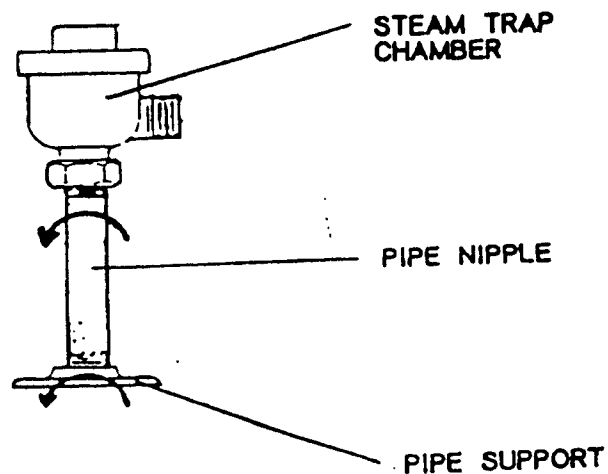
Steam trap Chamber and Pipe Support Removal.
